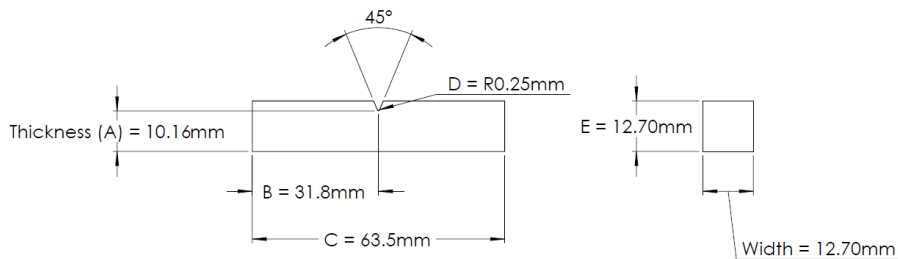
Test specimen dimensions as defined by ASTM D256-10.
